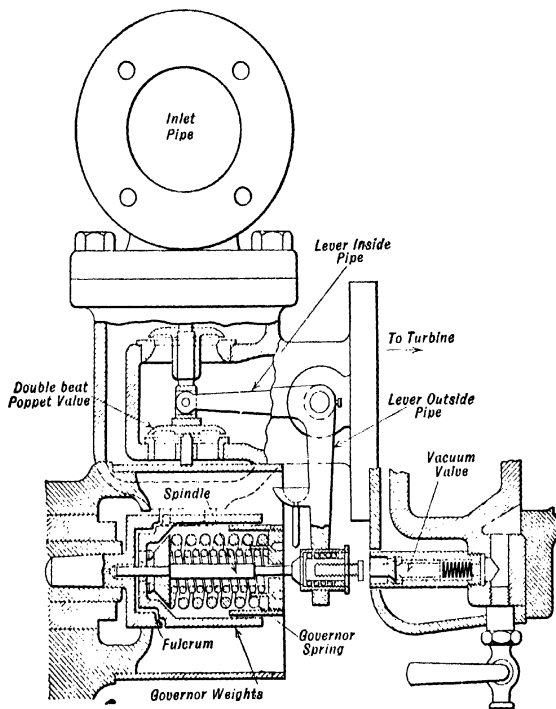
Throttle Valve and Governor De Laval 35-kw. Turbine.
